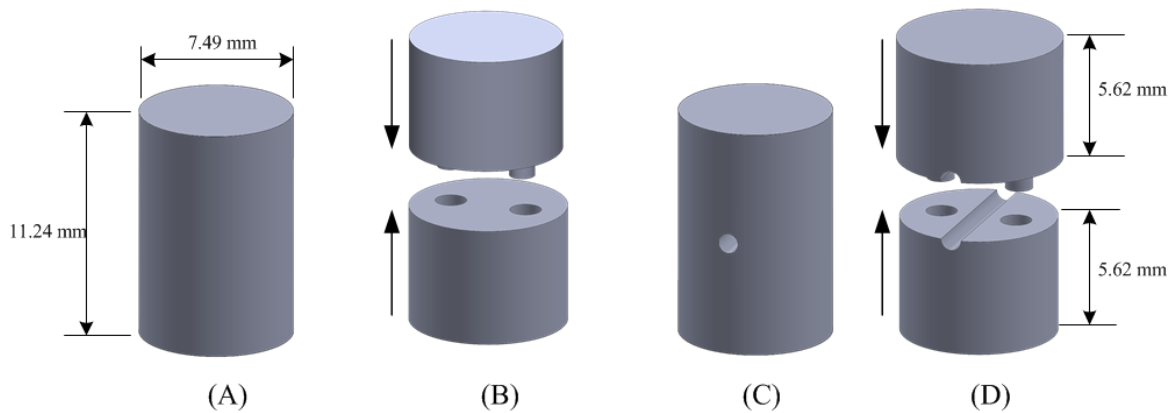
Schematic representation of the shear test samples: a) control sample printed entirely in one cycle of printing; B) AAM sample; C) control sample printed in one printing cycle with a horizontal channel; D) AAM sample with a horizontal channel.
